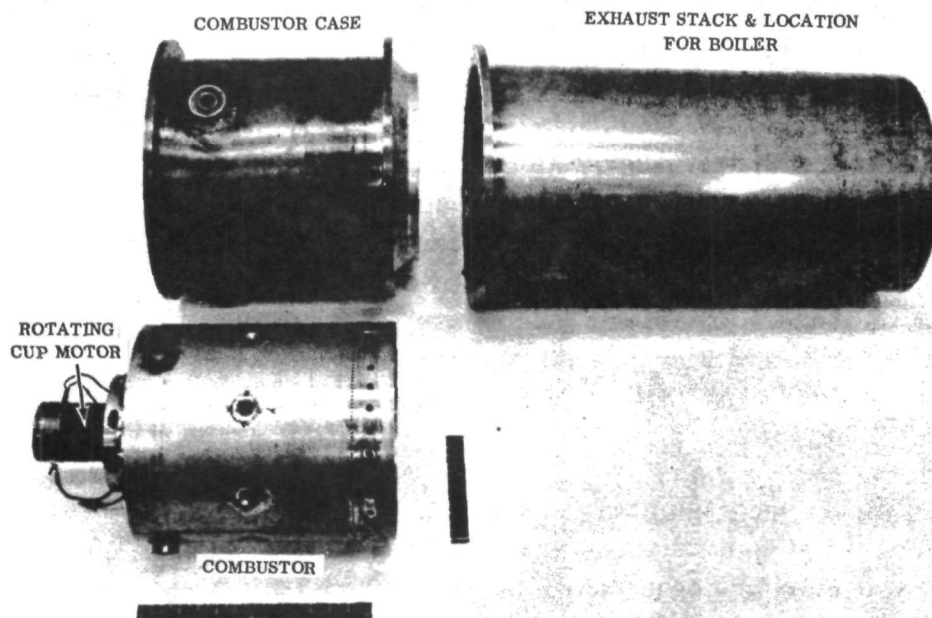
SIDE VIEW OF ROTATING CUP COMBUSTOR ASSEMBLY
